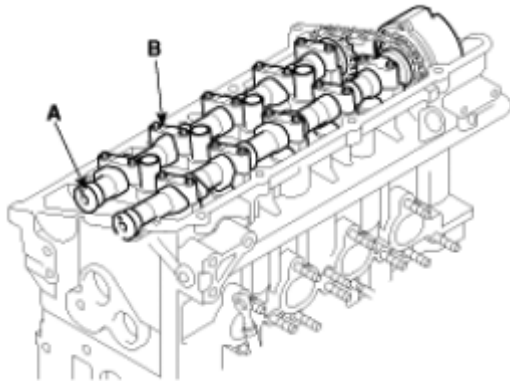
Aligning Camshaft Timing Chain With Intake Timing Chain Sprocket And Exhaust Timing Chain Sprocket
